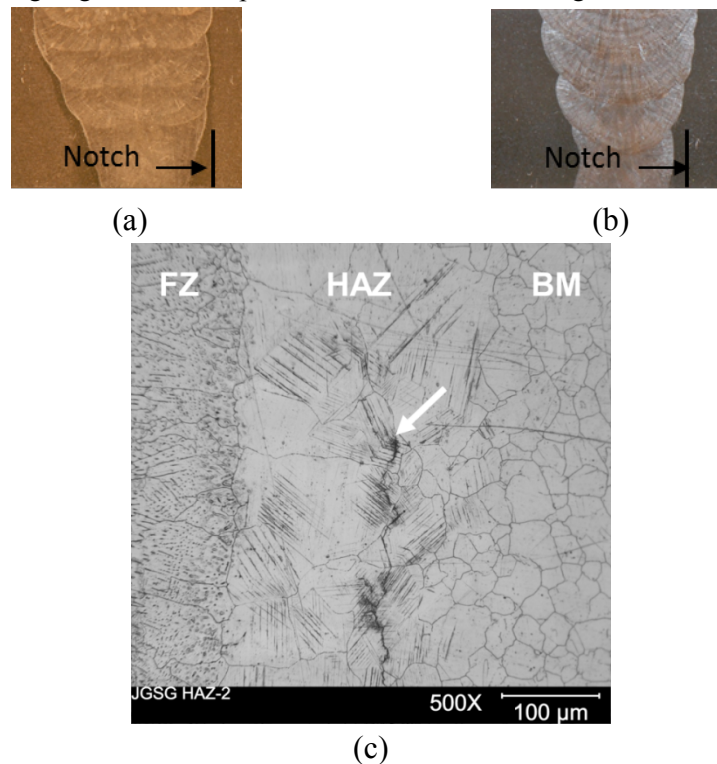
Micrograph of GTA welds fabricated from (a) modified weld joint, (b) conventional weld joint, (c) modified weld joint with precrack terminated in the HAZ. The white arrow points to the precrack termination point which is located in the HAZ.
